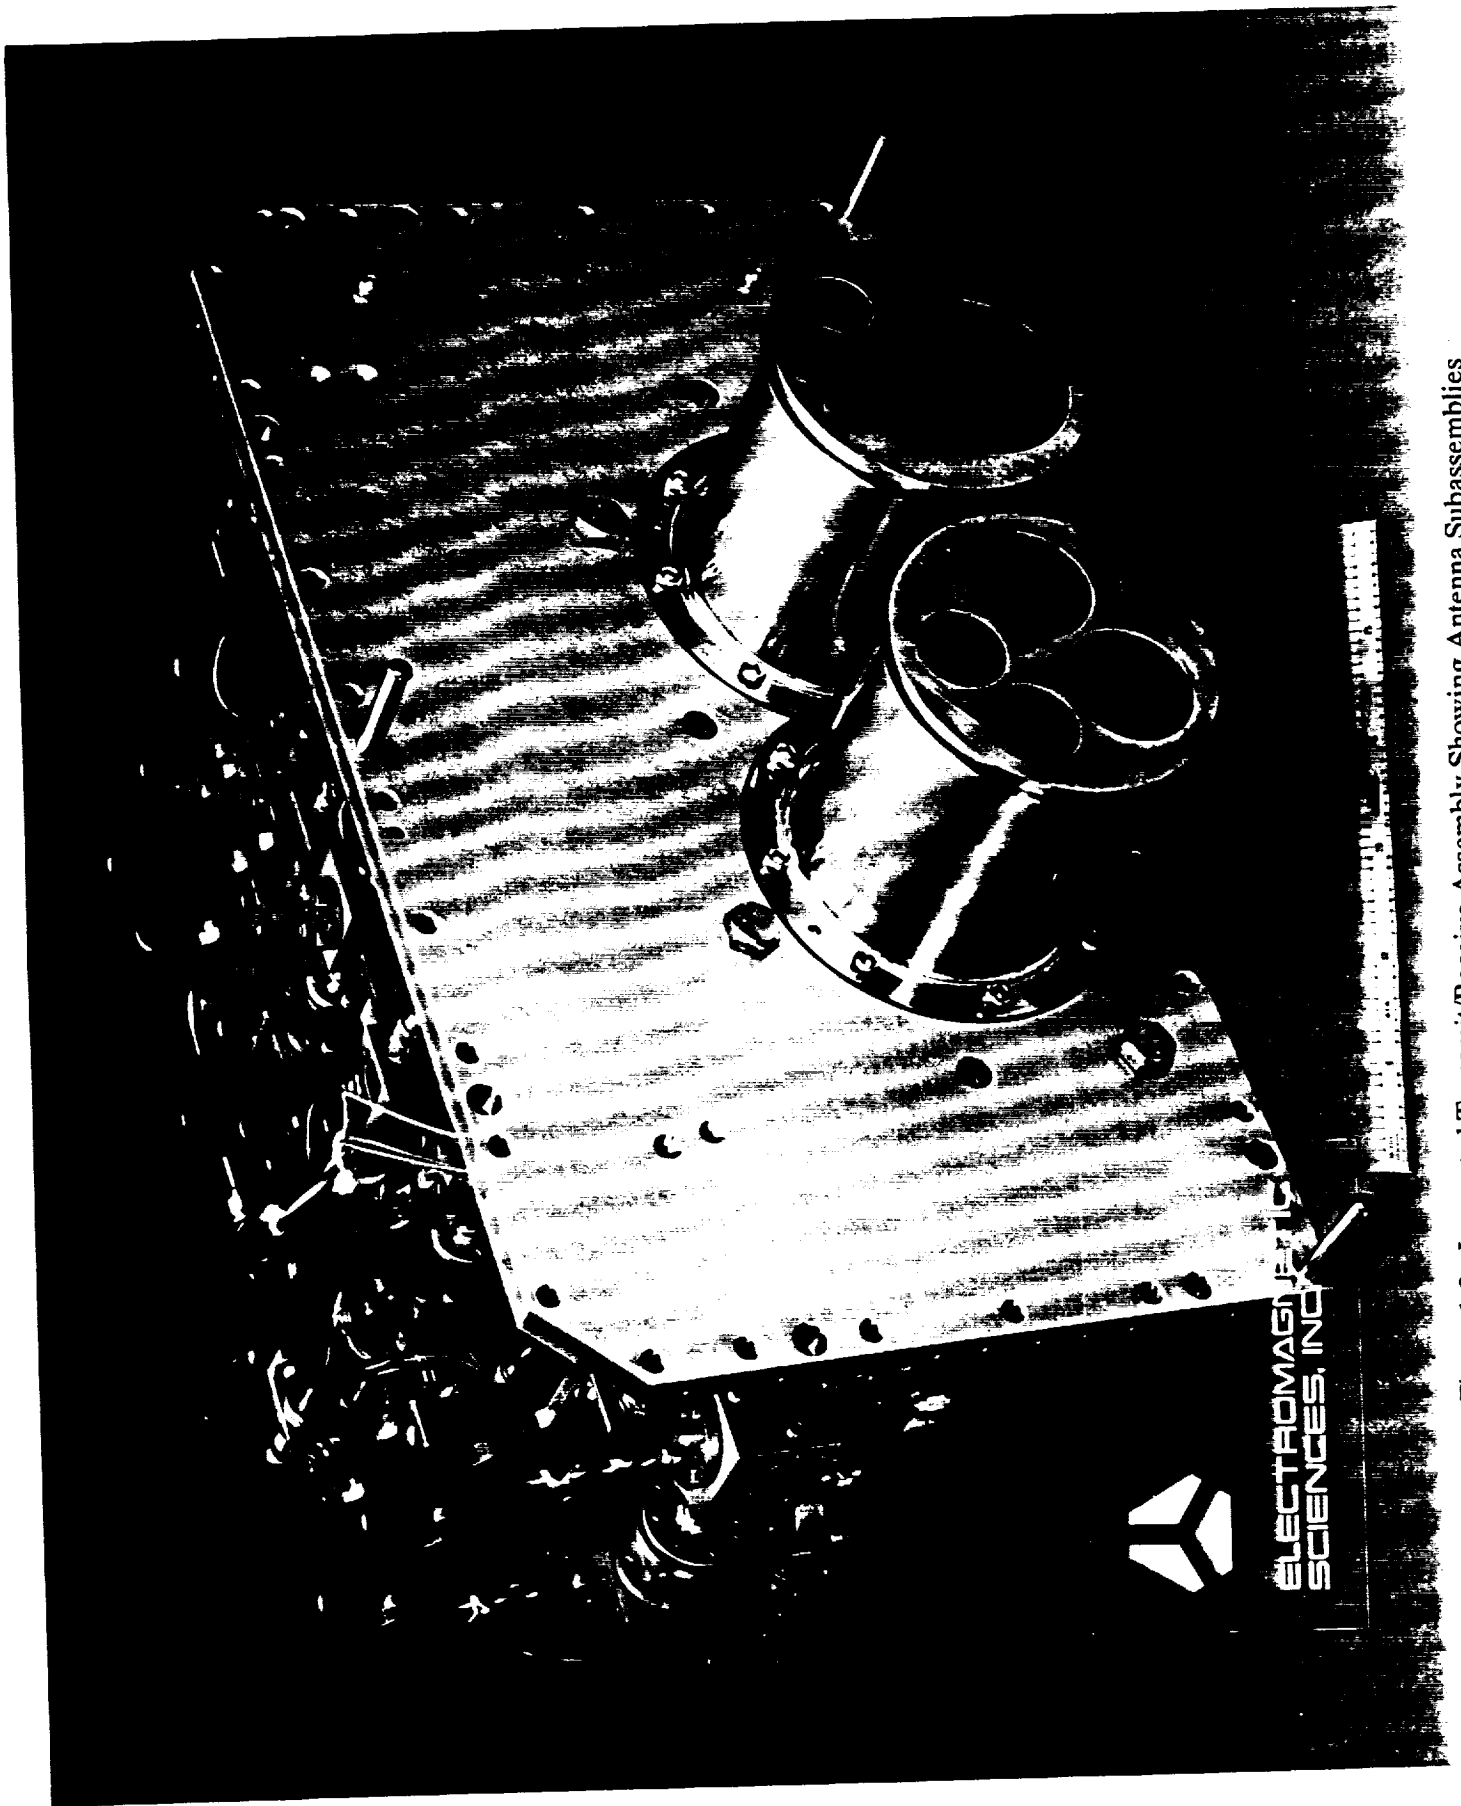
Integrated Transmit/Receive Assembly Showing Antenna Subassemblies
